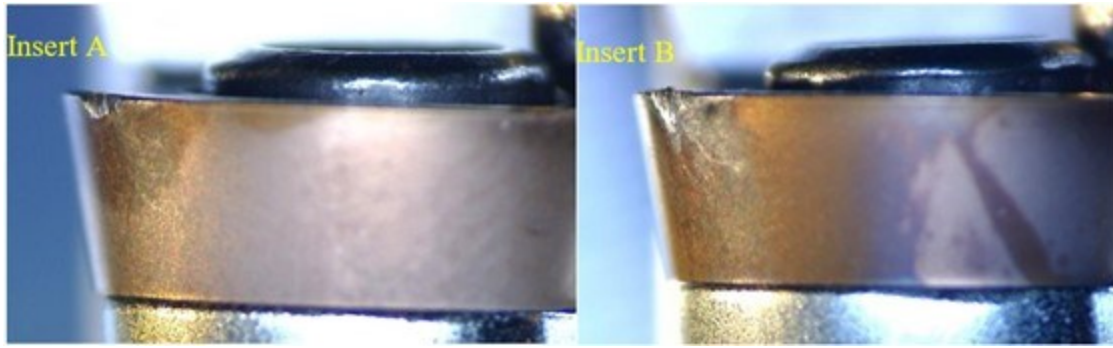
The wear images of insert A and B after milling six layers of the workpiece.
